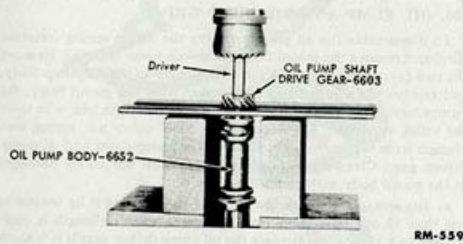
Removing Oil Pump Shaft Gear From Shaft
